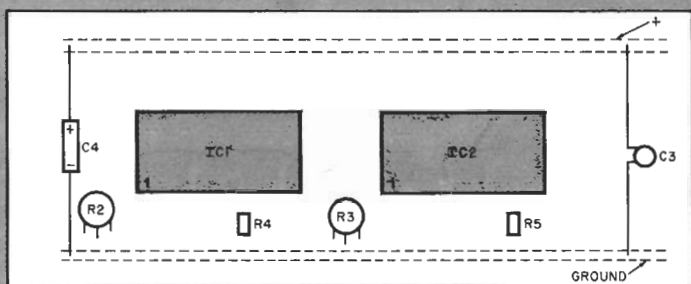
In lieu of a custom printed circuit board, the LED driver can be mounted on a universal breadboard, as shown here.
